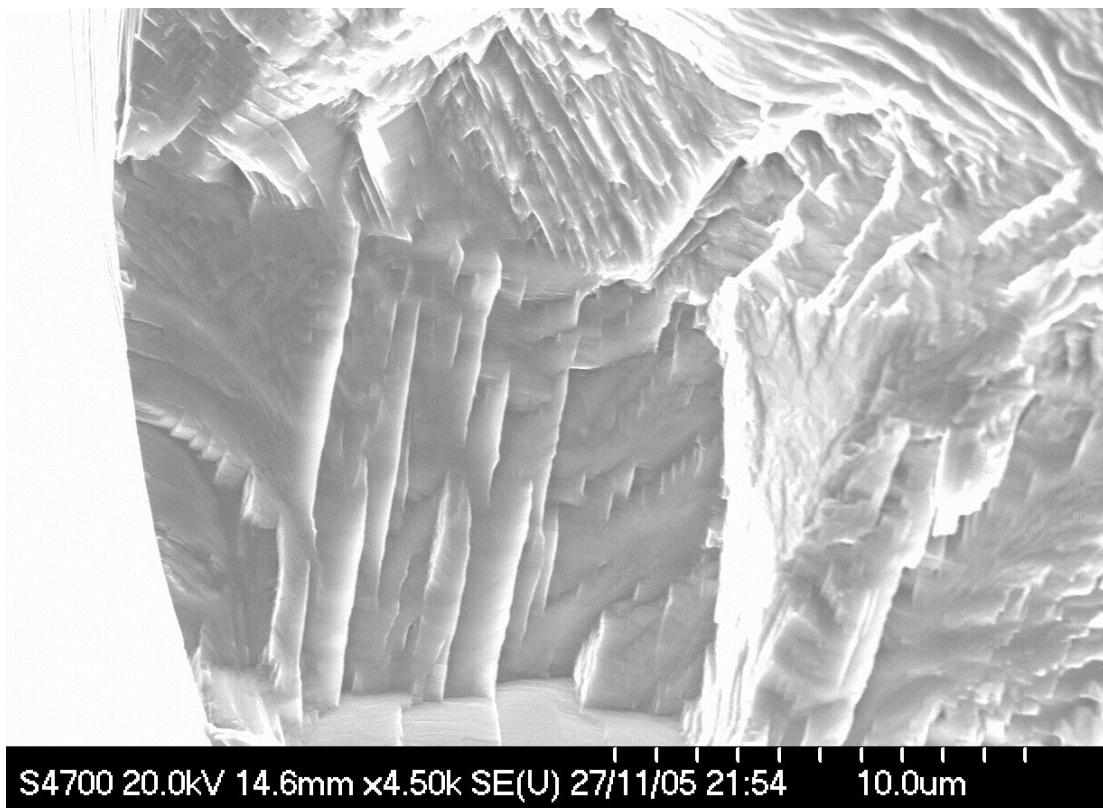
Close-up of faceted fracture surface shown in figure1. 75 μ m specimen.
